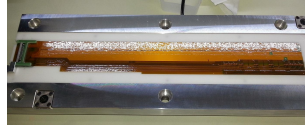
Long flexible PCB 'Origami CE' gluing jig
